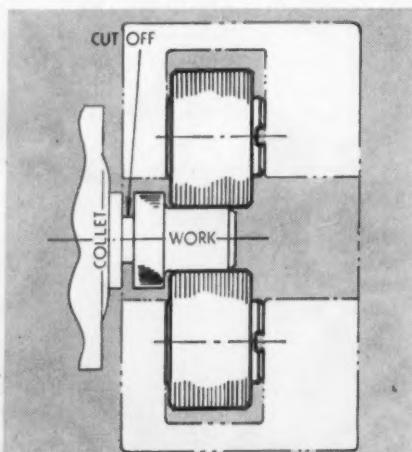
Rolling straight type threads on the outboard end of a piece of work.
